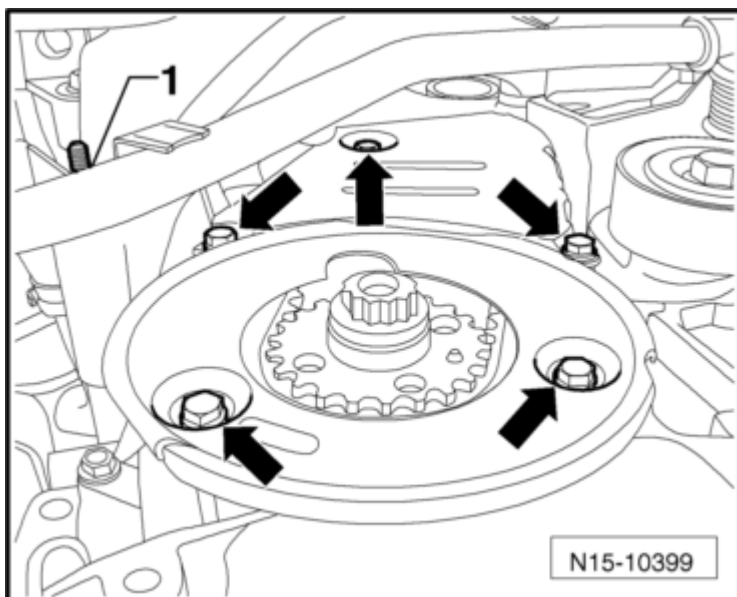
Identifying Lower And Center Toothed Belt Guard Bolts -Arrows-
